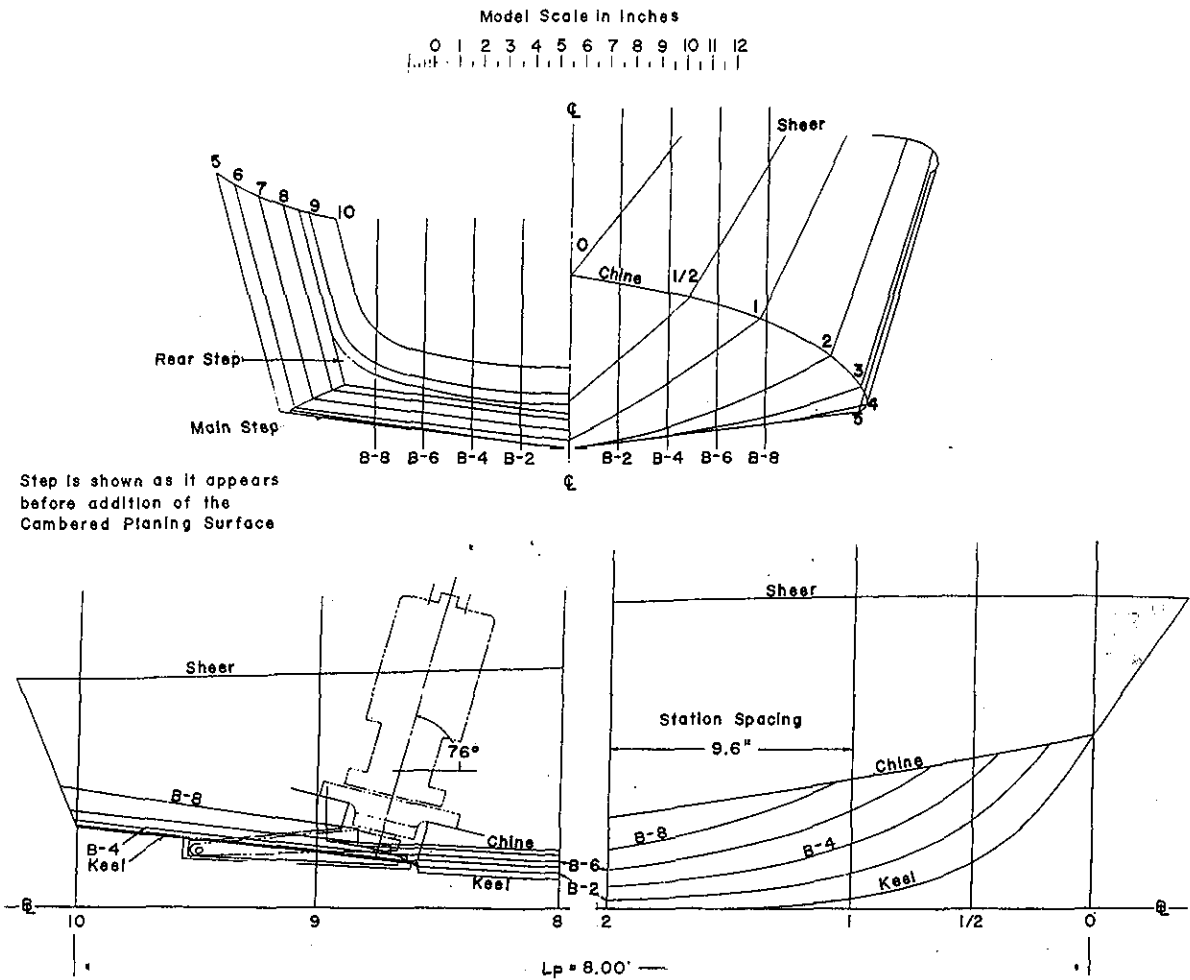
Model 5115 - Body Plan Drawing, Profile Drawings of Bow and Stern, and Centerline Section of Stabilizer in Retracted Position.
